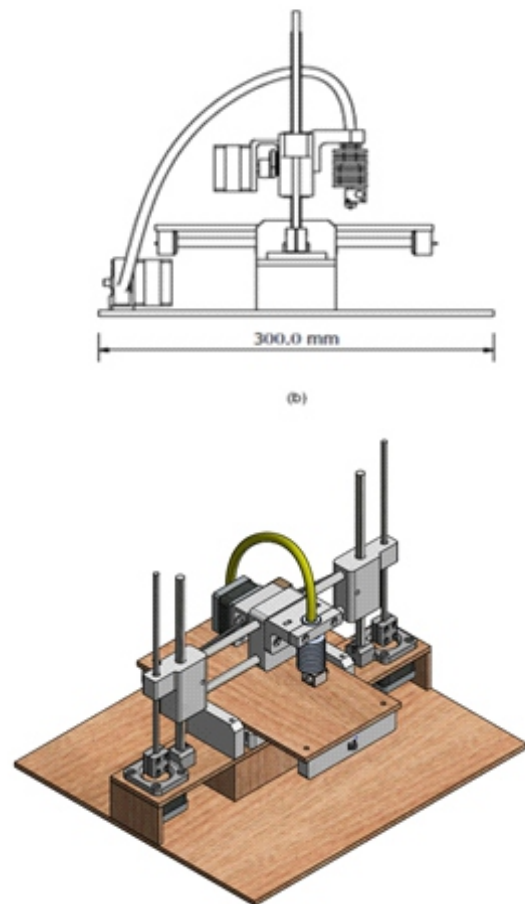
Complete Assembly of the 3D printer showing the Frame (Front view) drawn with Autodesk Inventor
